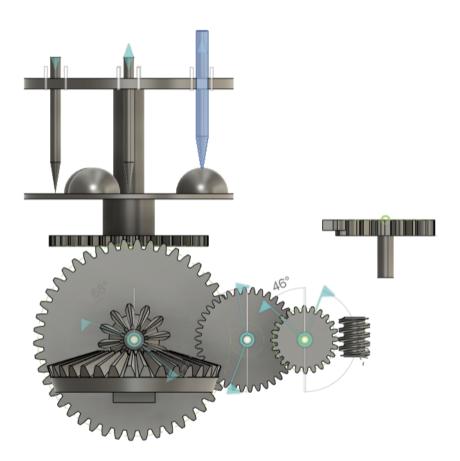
Detailed CAD assembly of the gear train and follower mechanism.
